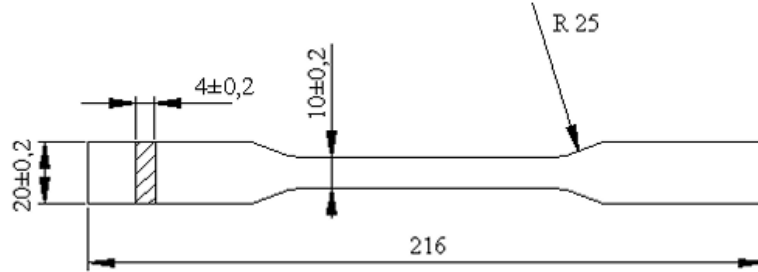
Multi – purpose test specimen dimensions according to TS EN ISO 3167 Type A
